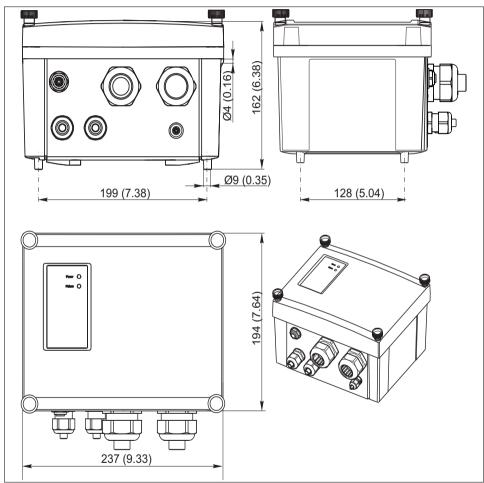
Liquiline System CAT820 dimensions. Engineering unit mm (in).
